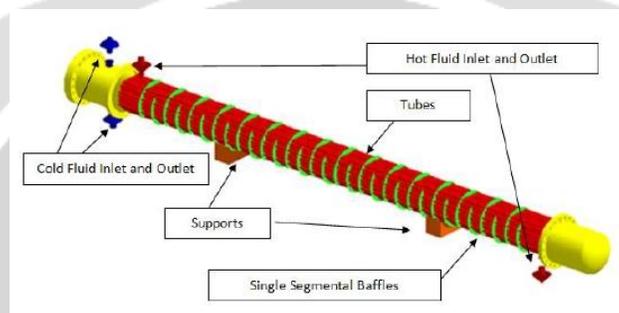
3D Model Internal Construction of Shell and Tube Heat Exchanger
